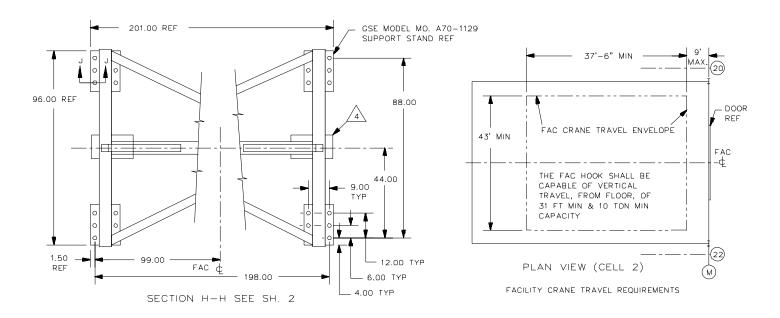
GSE SUPPORT STAND & PLATFORM CLEARANCES
